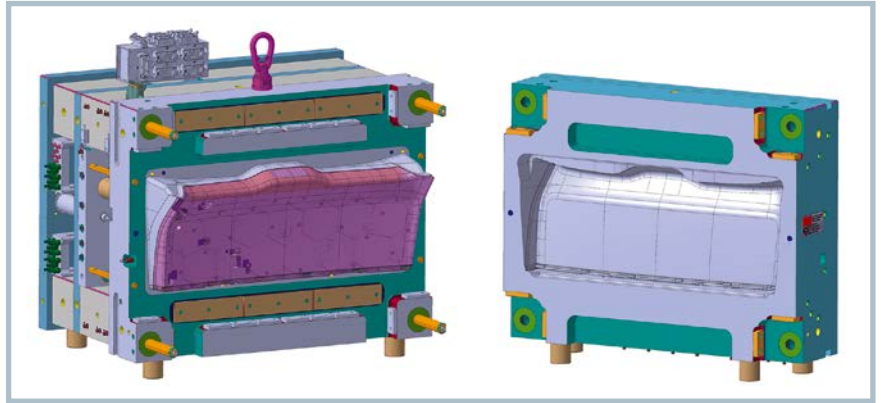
Despite the greater complexity of the mold design and the greater outlay for the controller of the injection molding machine, parts made by injection compression molding cost around 11 % less (© Georg Kaufmann Formenbau)
